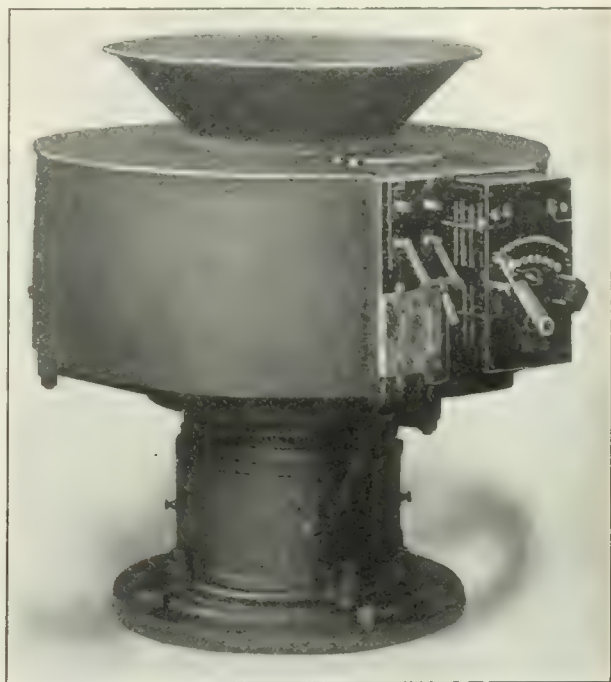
Rear View of the Auto Sand Mixer, Showing the Cutting Blades.
